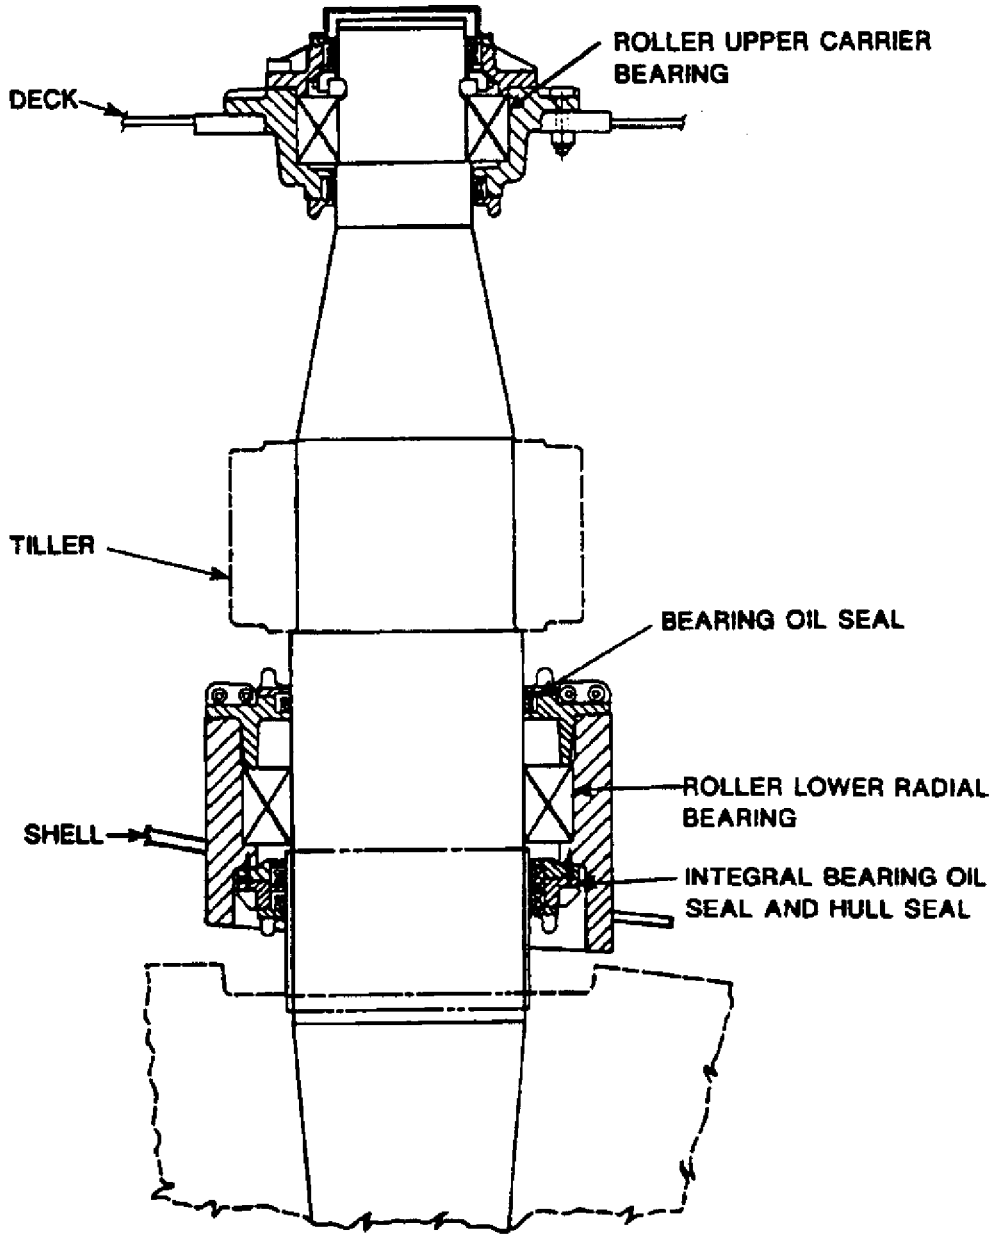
Old Roller Bearing Arrangement of Rudder Stock Bearings
